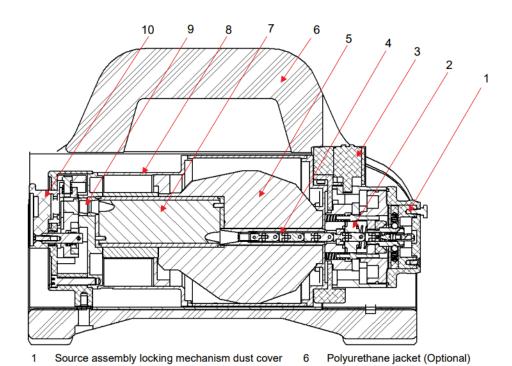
"EXERTUS FORTES" Package Assembly Drawing
